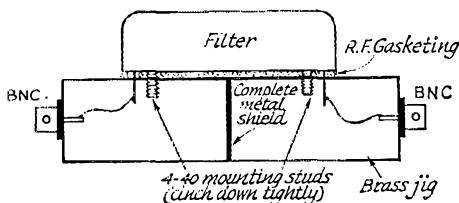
Mounting for a single filter, using BNC connectors for the coax cables. At least one compartment should be soldered to make it "water tight."
